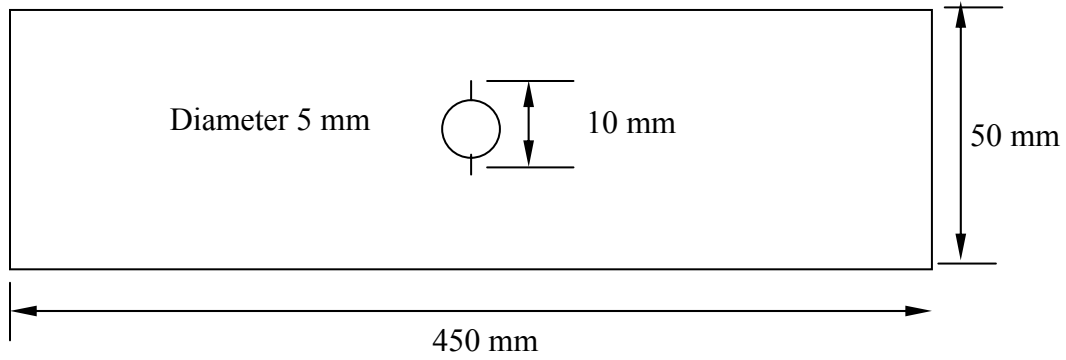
Weld design for single side weld repair (all dimensions in mm)
